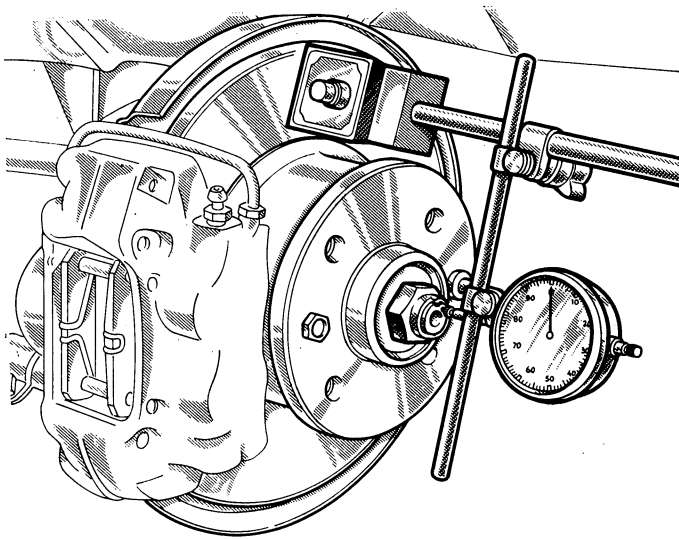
Using dial indicator with magnetic base to check wheel hub end play.
